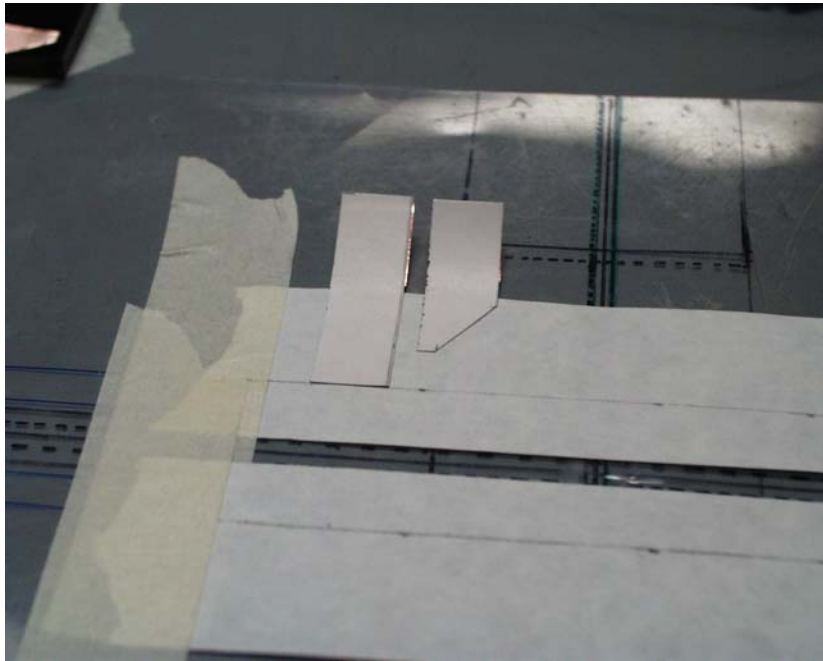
Terminal Pieces Positioned on Low-tack Tape
